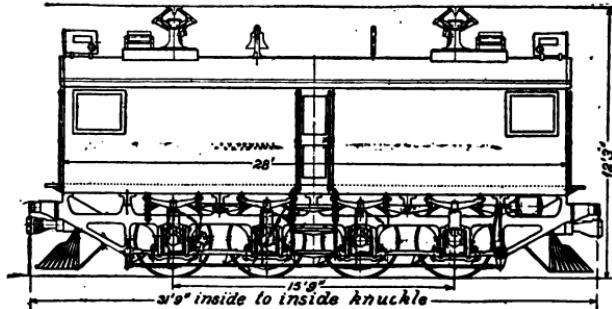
200,000-lb. electric locomotive, heavy freight.
